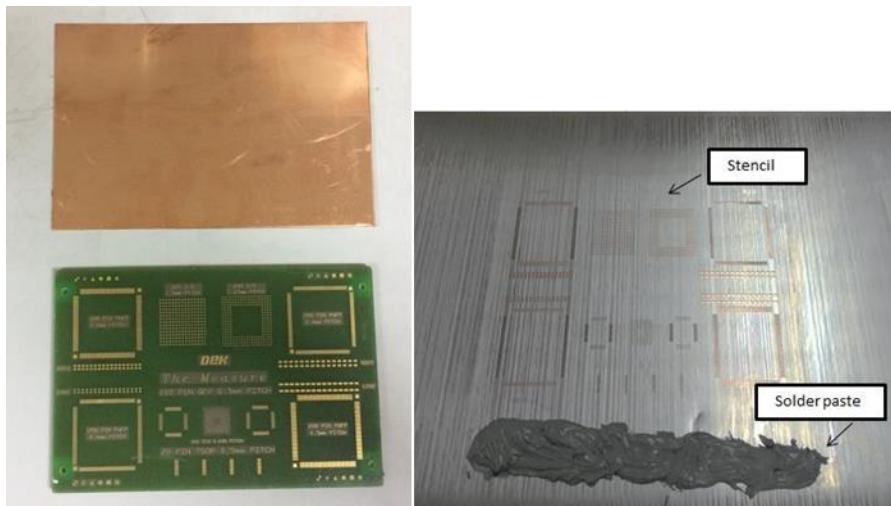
Copperplate with the same size as PCB for reflow and position of solder paste on the stencil
